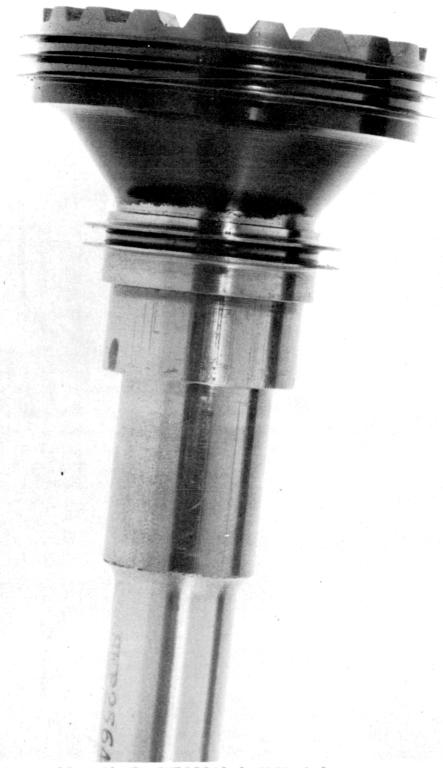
Shaft SKP25641-1,NASA 6:1 Compressor Test Rig,120-Percent Speed Test.
